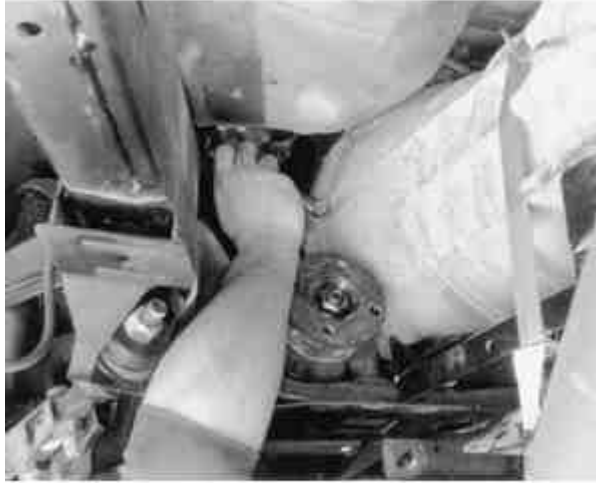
Remove the clutch slave cylinder from the transmission assembly
